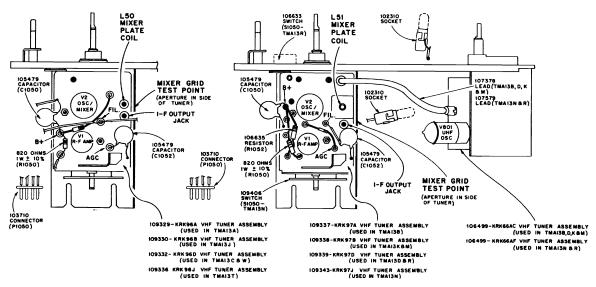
TMA13A, B, C, D, J, K, M, N, R, T & W Tuner Mounting Assembly Parts Identification
